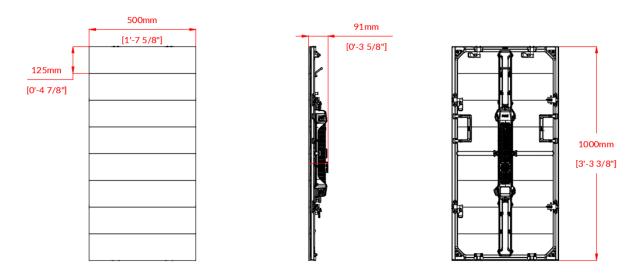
Jade Full Panel Dimensions (Unit: mm)
